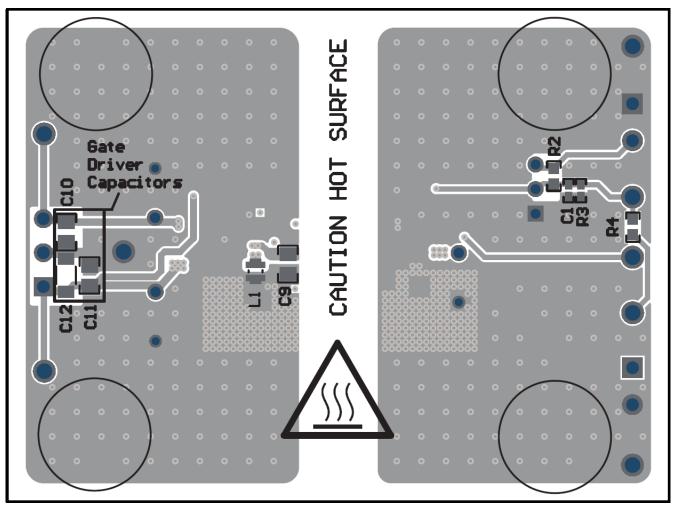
PCB Bottom Layer, Assembly (Mirrored View)
